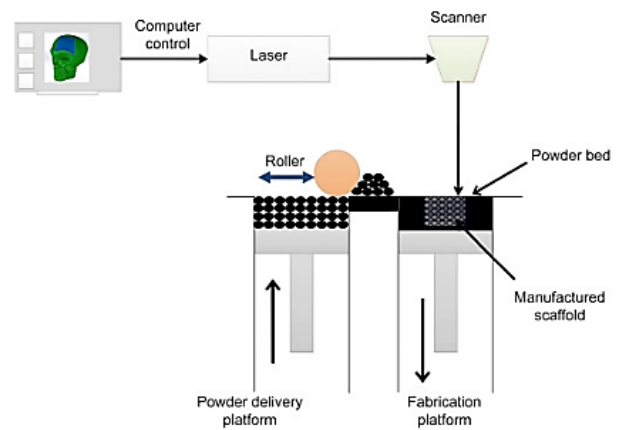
3D printer components: Selective Laser Sintering (SLS) [29 – 31]
